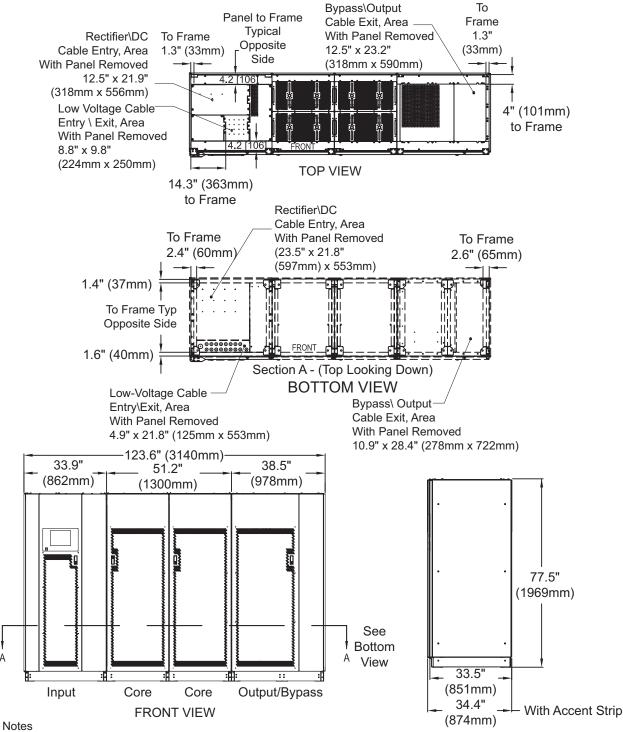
Outline Drawing, 625-800kVA Liebert eXL single-module UPS
